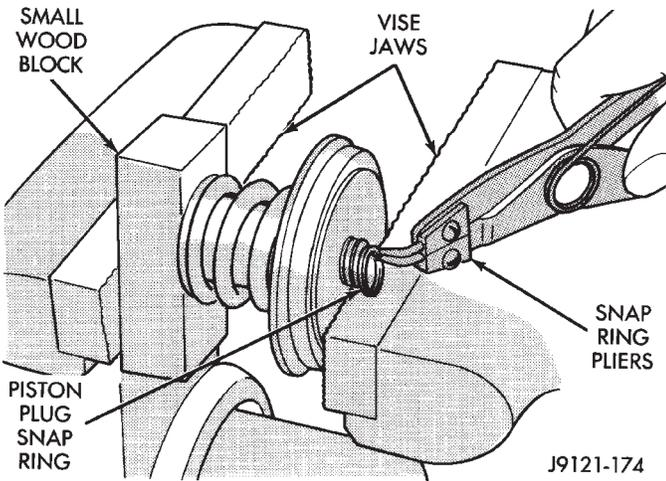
Removing/Installing Servo Piston Plug Snap Ring
